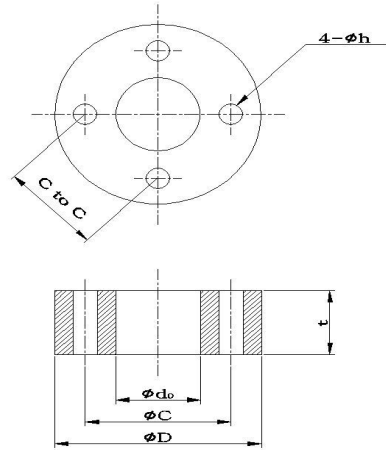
flange for workpiece (BL Type Nominal size 10-800A)
